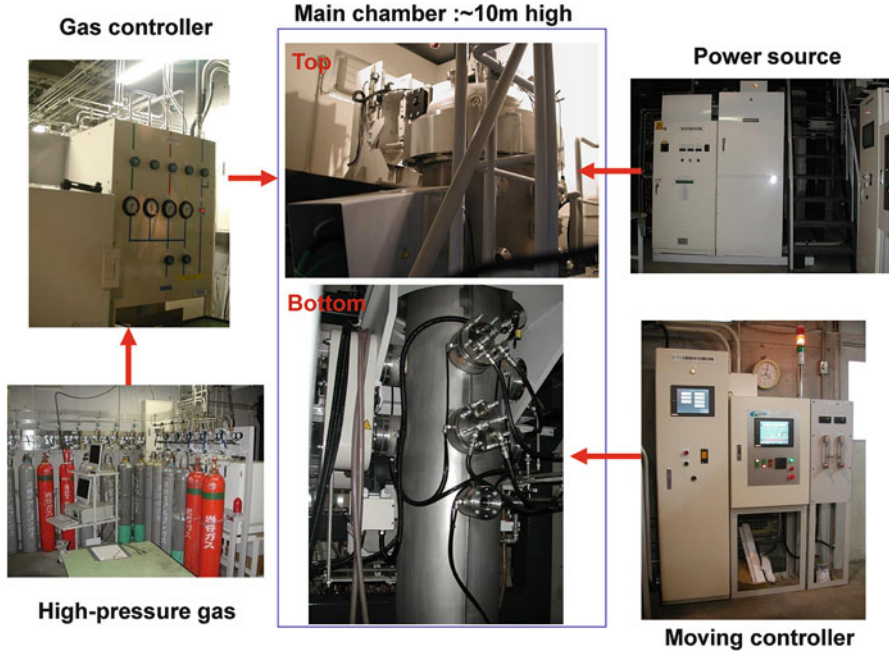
Photographs of the overview of fabrication apparatus for the continuous casting technique installed at Nakajima Laboratory of Osaka University. The *central upper photo* shows the upper chamber set up by heating part and solidification part, while the *central lower photo* shows lower chamber set up by mechanical pinch roller to pull down the ingot slab
